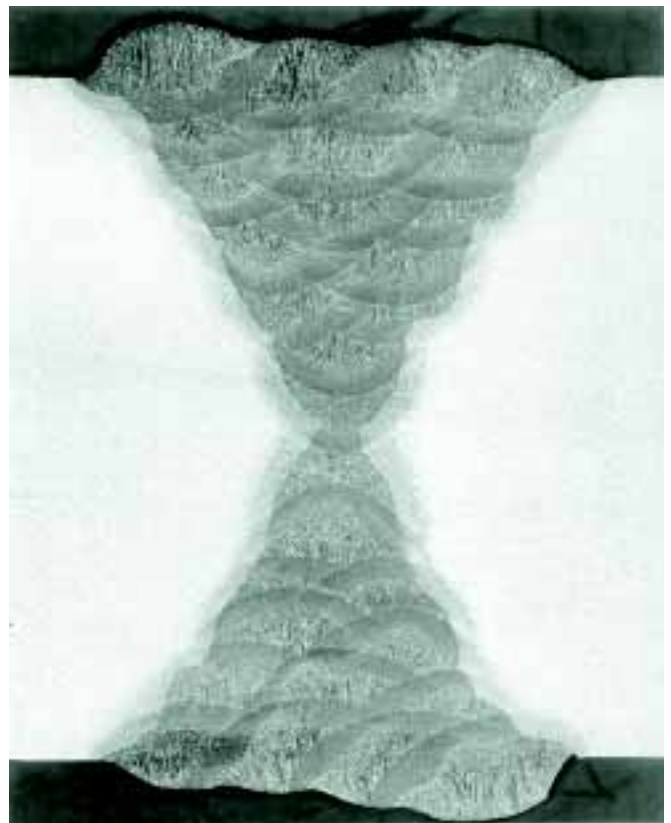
Typical macrostructure of double vee welded 40 mm thick plate
